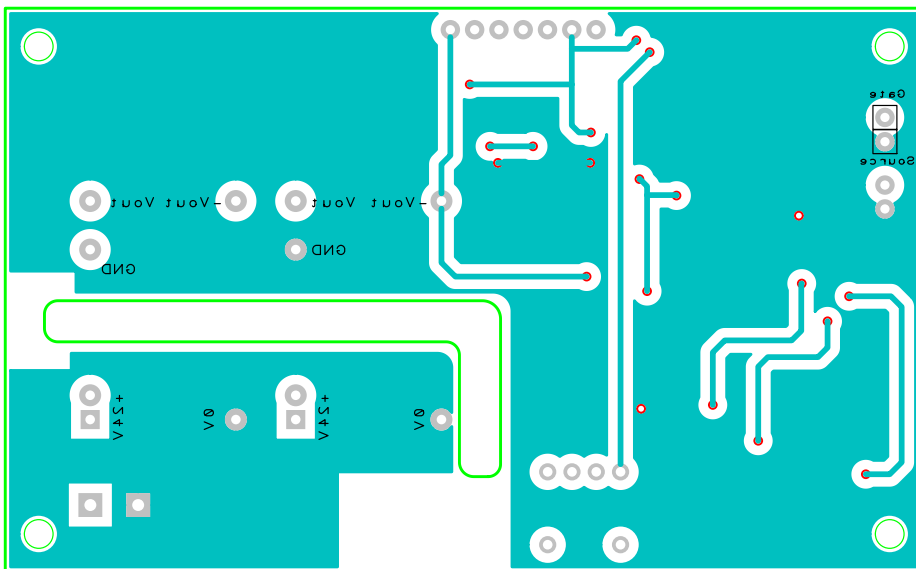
PCB layout of the PWM board: red and blue lines show the traces of the top and bottom copper layers, respectively
